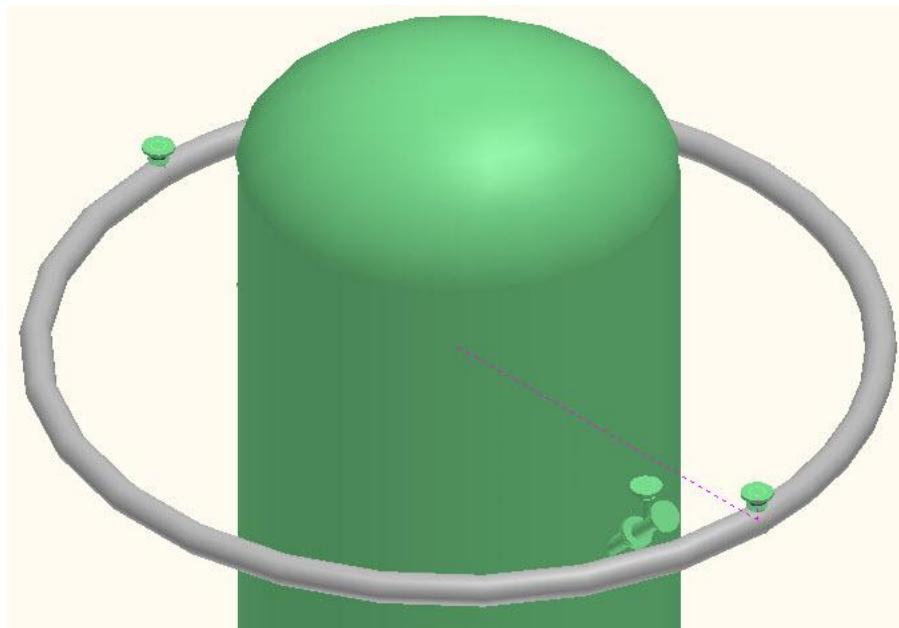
27: Isometric View of Flanges on Weldolets
